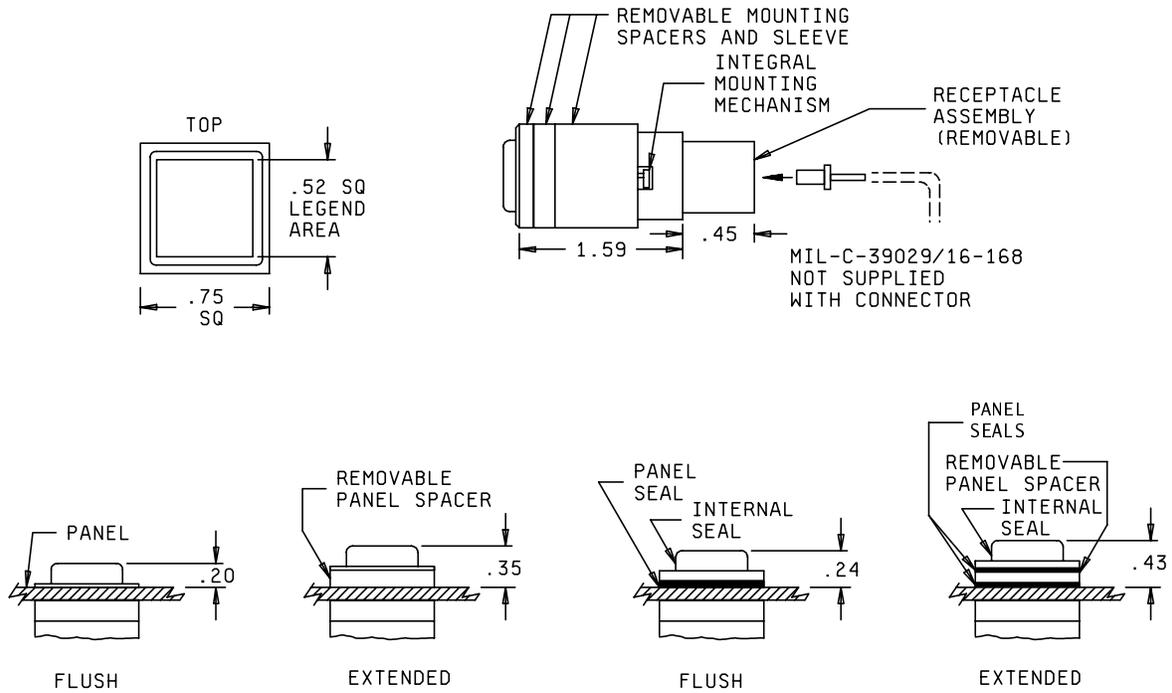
Switches - type I (unsealed, solder terminals) and type II (drip-proof seal(s), solder terminals).
